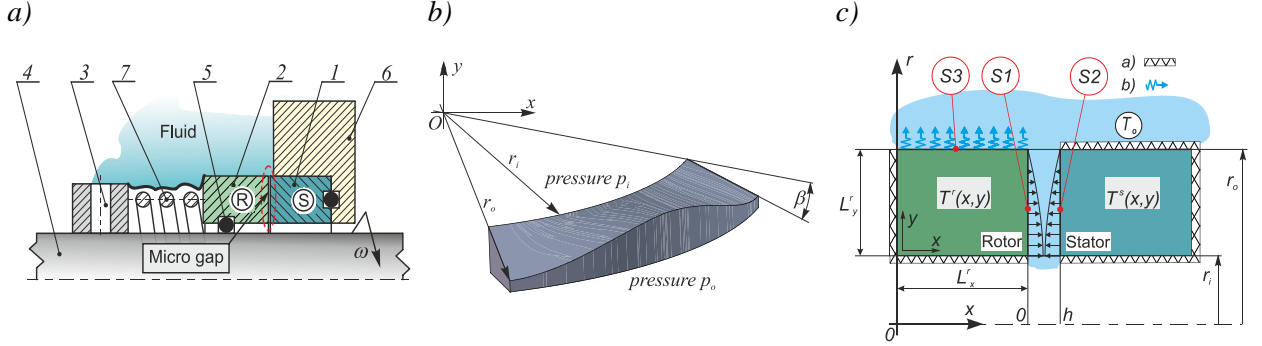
a) diagram of non-contact face seal. 1 - stator 2 - rotor 3 - steady pin, 4 - shaft, 5 - O-ring 6 - housing, 7 - spring; b) ring surface profile; c). conditions of heat transfer in the non-contact face seal, a) isolated surfaces, b) heat transfer by convection.
